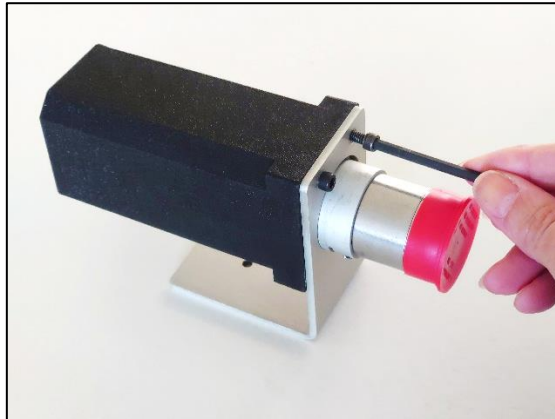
Use an Allen key 9/64" or a screwdriver to disconnect the standard bracket from the valve
